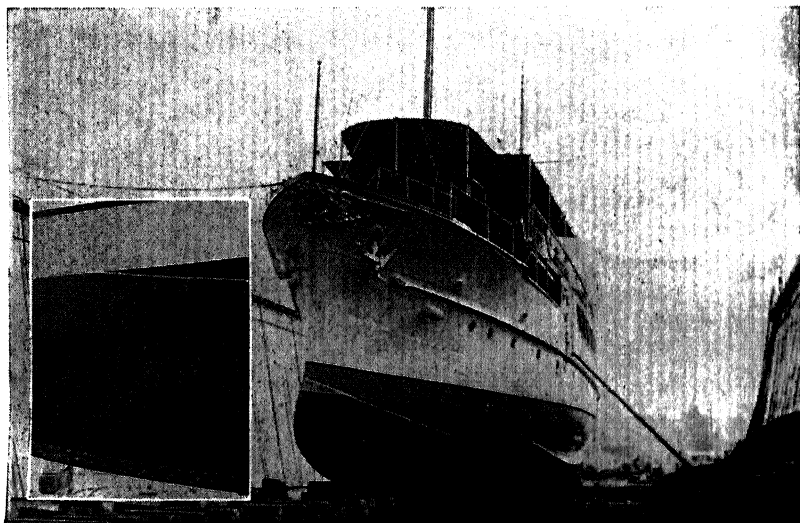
Hull of this yacht was badly corroded below water line. Conventional method of repairing hull by cutting old plating away from frames and riveting on new plates would have cost \$45,000. New steel plate was added to the corroded hull at a cost of \$15,000. Careful check on weight of material added showed an increase of ten tons. Increased draft $2\frac{1}{4}$ in.
